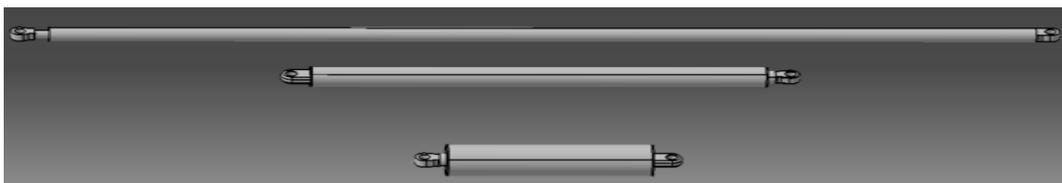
CAD model of different sizes of hydraulic cylinders used for the sidelifter
